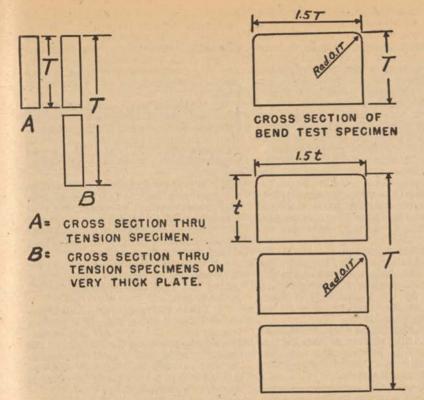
(n2)-Cross section of bend-test specimens from very thick plate.
